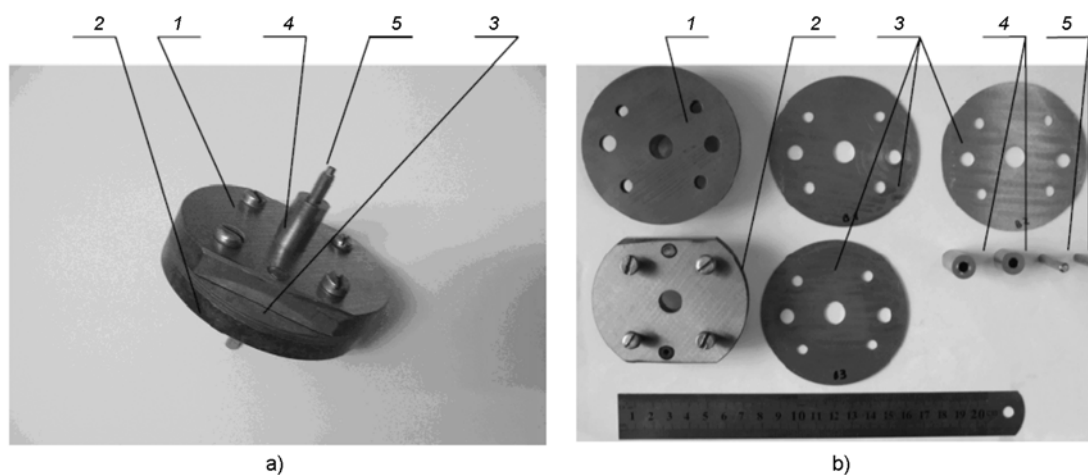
Mold— a) mold assembly; b) mold components: 1 and 2 — are the upper and lower parts of the demountable mold; 3 — are flat plates; 4 — are punches; 5 — are axial insertion into punches for toroidal samples pressing.
